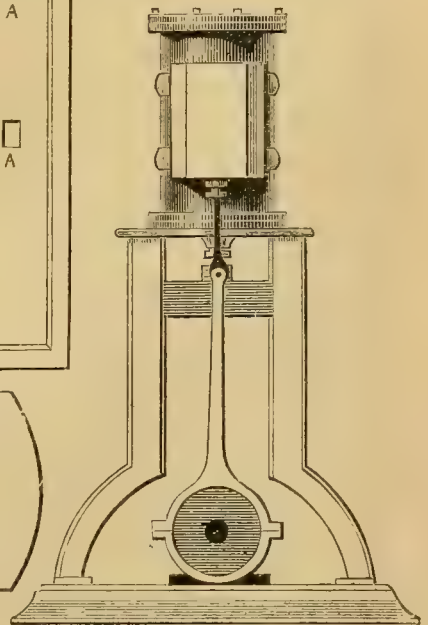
END VIEW OF LAUNCH ENGINE, COMPLETE.
